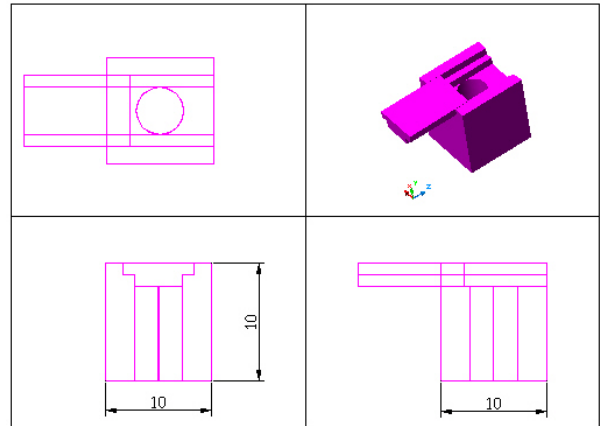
A drawing of present used irradiated specimen block of TEM.
